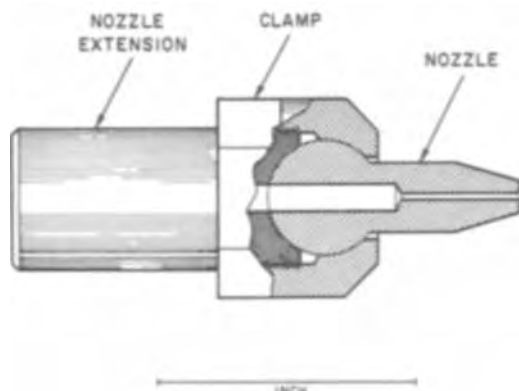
Nozzle assembly used in rinsing and air-wiping of the wire.
